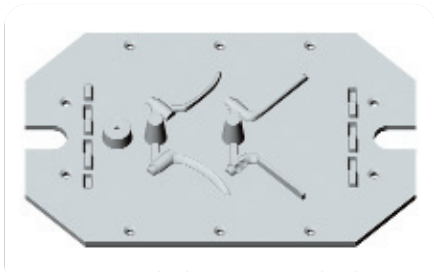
Matchplate (cope side shown) with mounting holes, alignment locators, gates, risers and sprue mounting pad.
